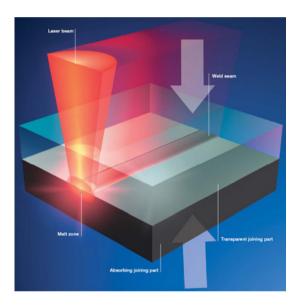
Transmission laser beam welding configuration using a transparent and an absorbing part
